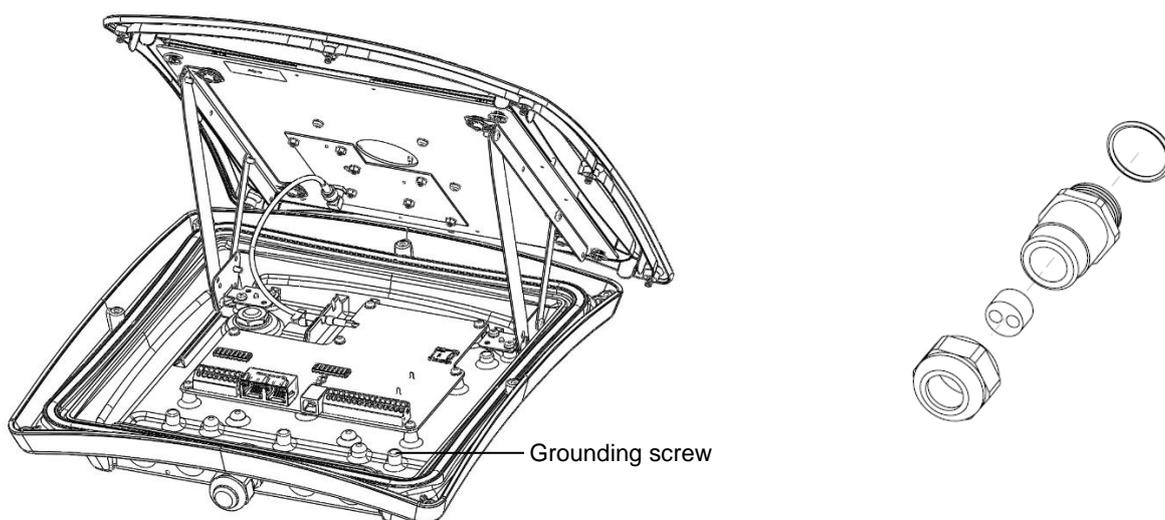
XT-1 with open lid (left) and cable gland with insert for two cables (right)
